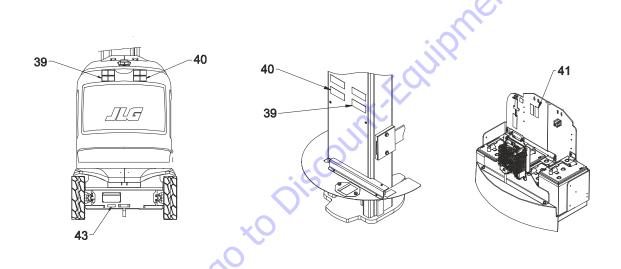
Decal Installation - 20E ANSI Market - Sheet 2/2
